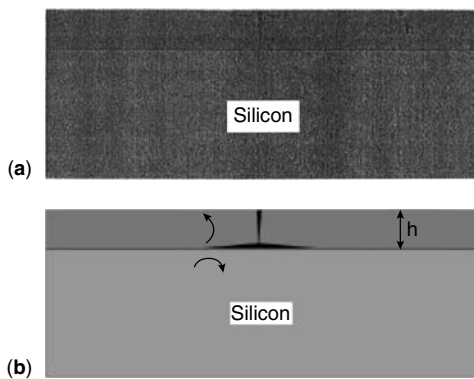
Optical micrograph of flip chip assembly with corner crack extending into solder mask (a). This corner crack further developed into delamination after temperature cycling (b) [23]
